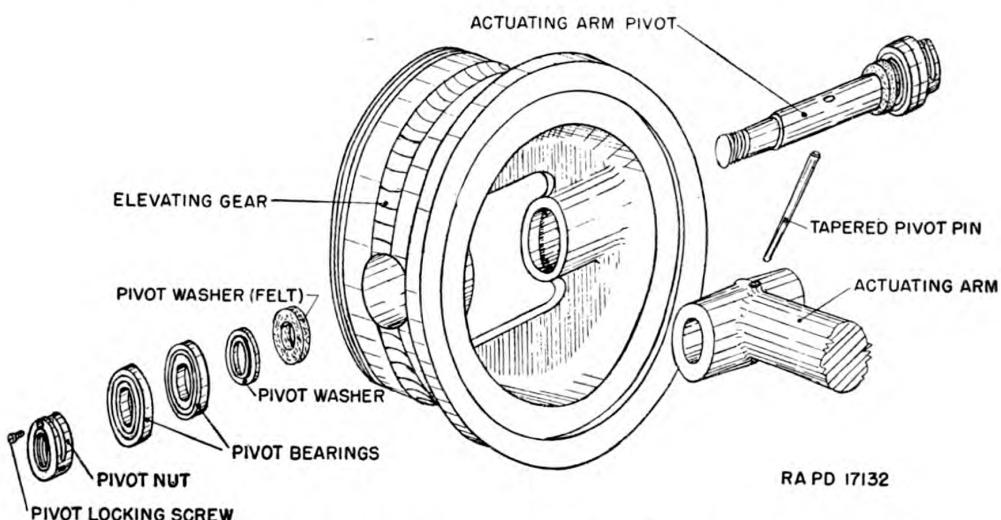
Exploded view of elevating worm gear pivot and related parts.
